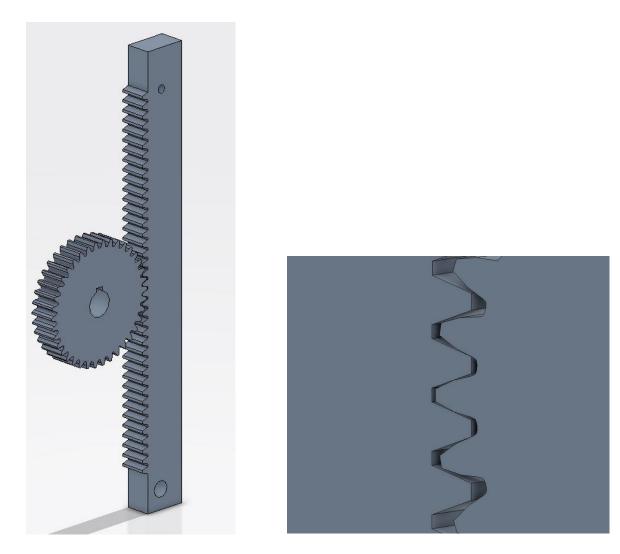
Mounting of Rack and Pinion and Line of Contact
